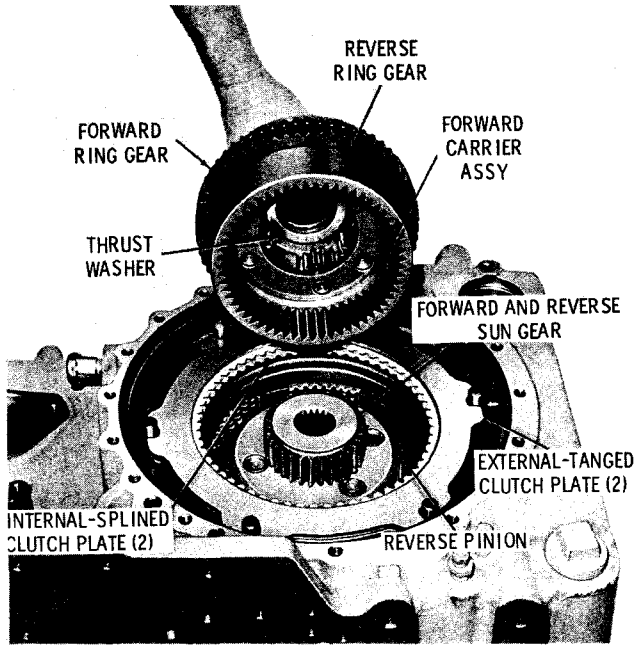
Installing forward planetary carrier assembly and attached parts (TRT-3 overdrive)
